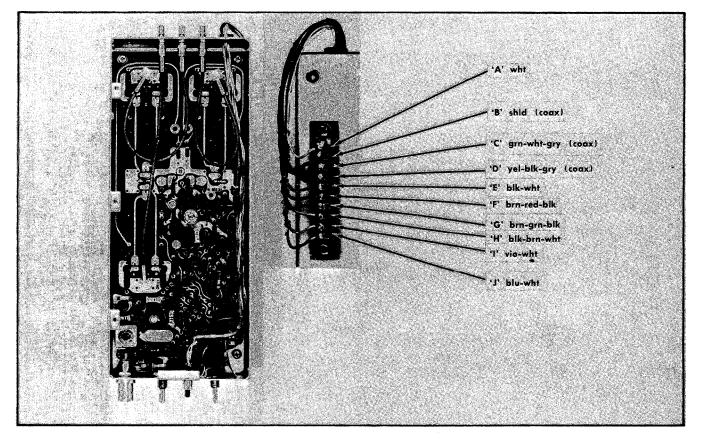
Phase lock assembly and wiring color code to the pin connector.
